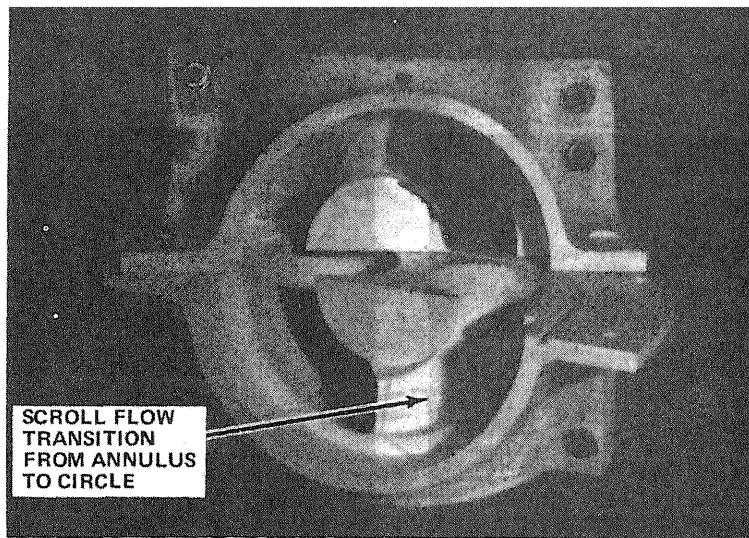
Single Bearing Swivel-Scroll Plenum Nozzle
